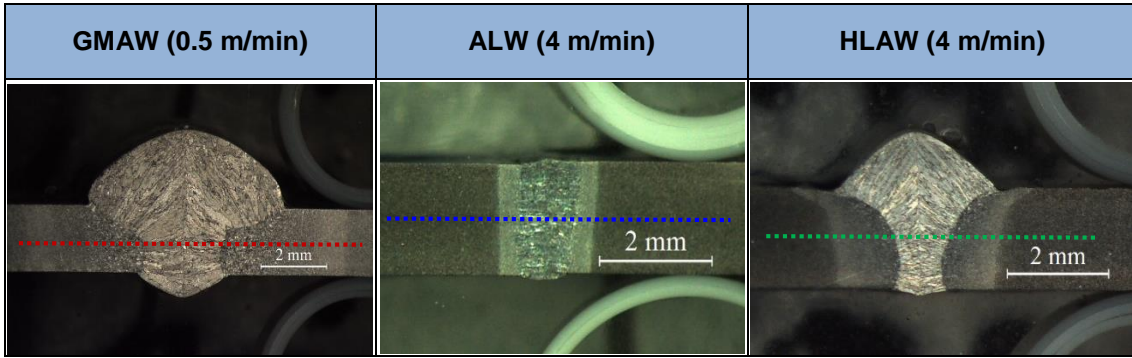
Macrographs of weld joints and marked hardness measurement location in 2 mm thick joints – Process (Travel speed)
